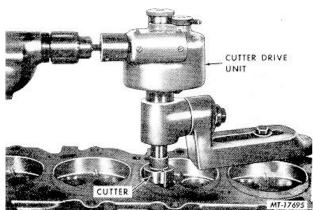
Using SE-1797 Counterbore Tool For Machining Cylinder Head For Insert Ring Installation
